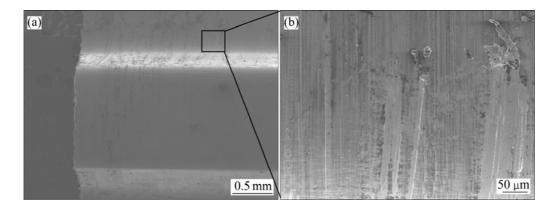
SEM images of micro U part (blank holder force 3 N): (a) Whole photograph; (b) Local photograph
